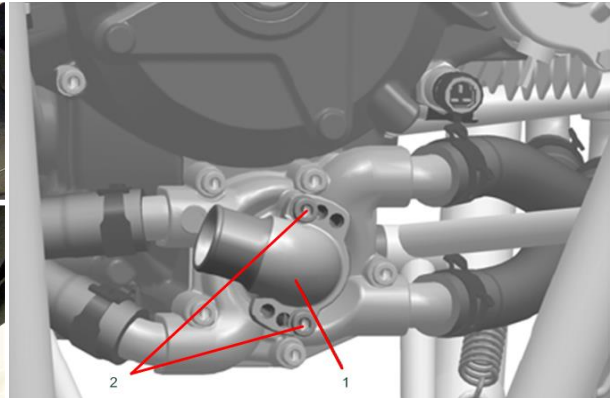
Water pump: 1-Water inlet elbow 2-Mounting bolts
